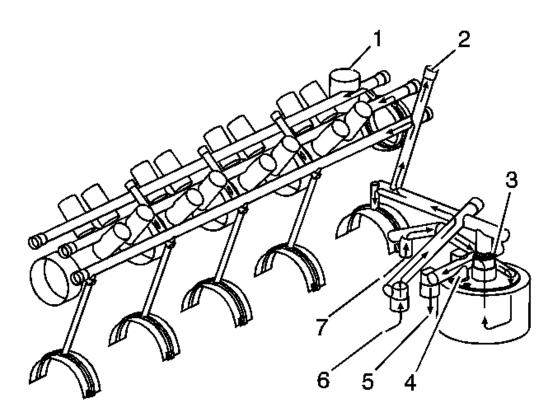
View Of Lubrication Components Courtesy of GENERAL MOTORS CORP.
